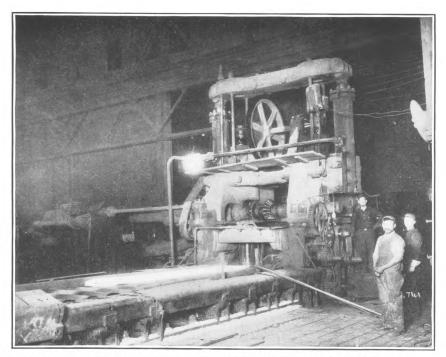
TRANSFER TABLES OF HEAVY ROLLING MILLS, SHOWING GUARD COVERING GEARS.
